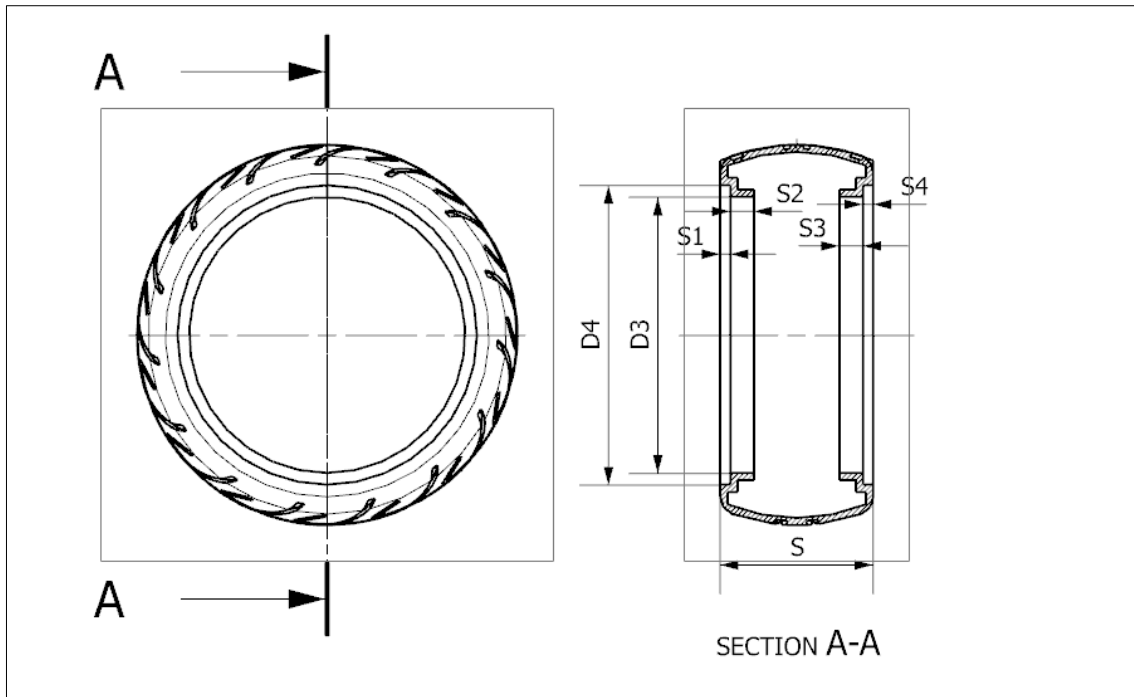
2D drawings of the tyre part with dimensional descriptions
